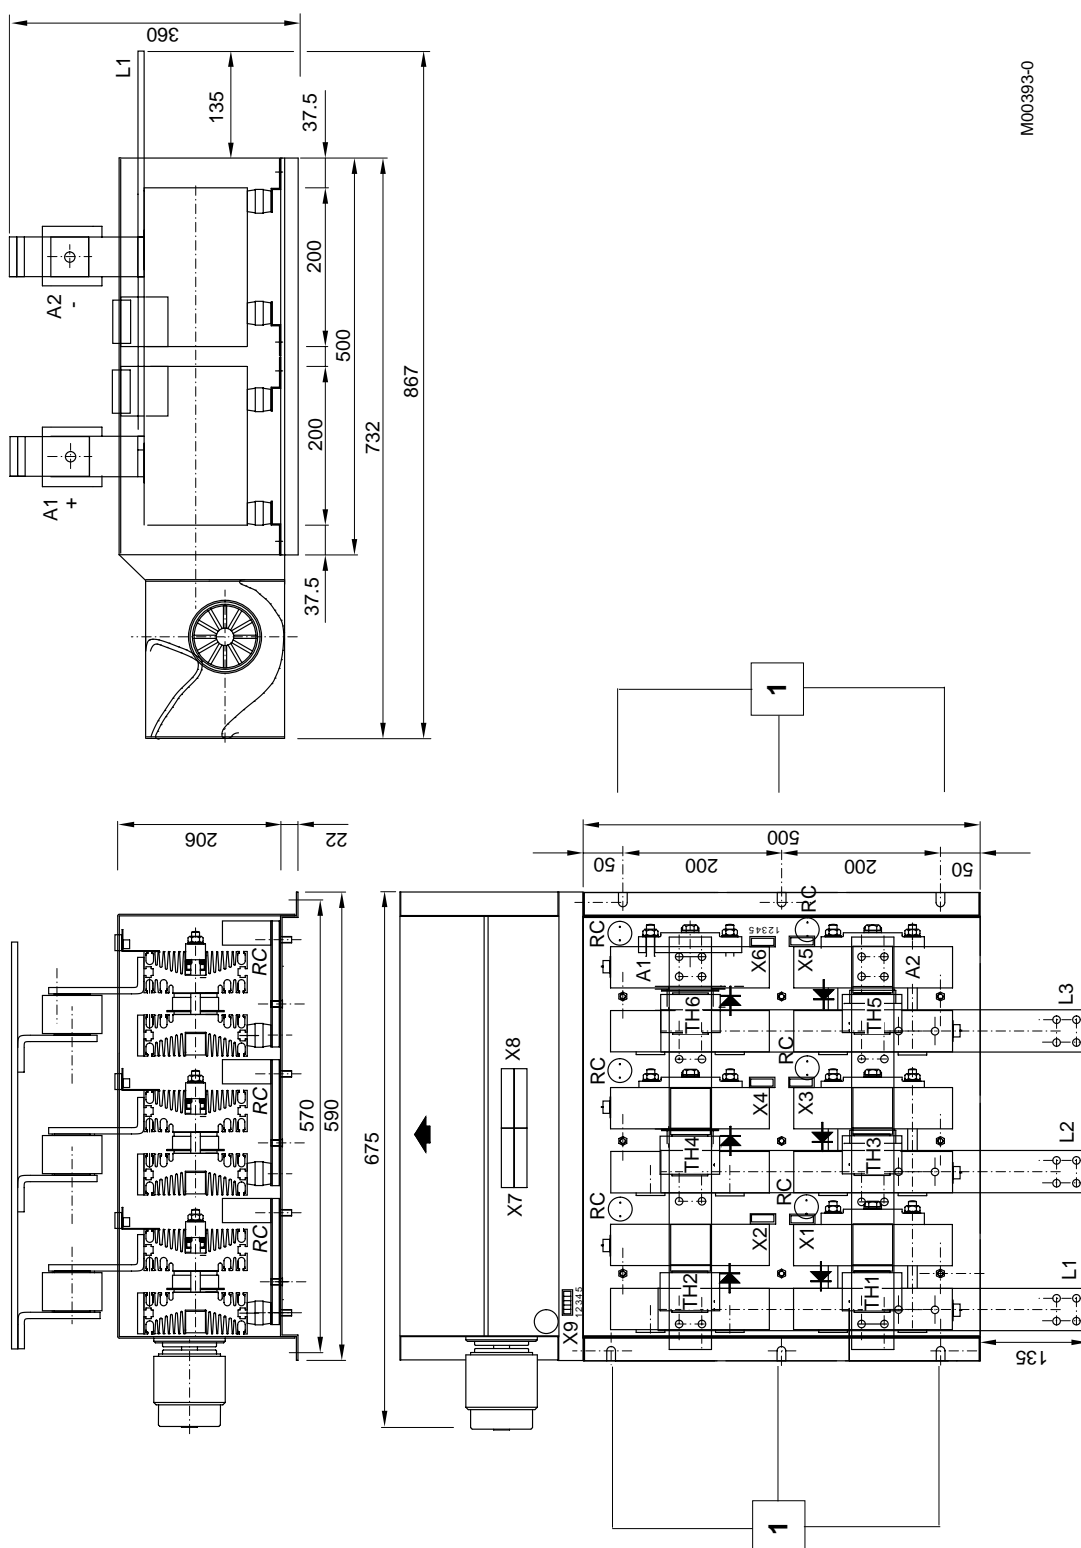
External and fixing dimensions - Modular CTM90 size 3 power unit
